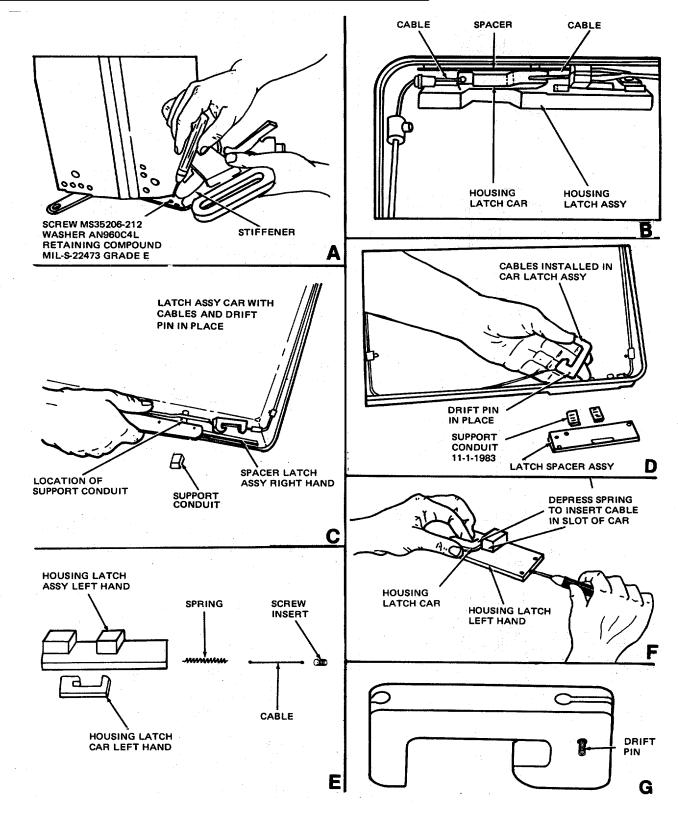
0V-1 aircraft RSSK stiffener and housing latch assembly
